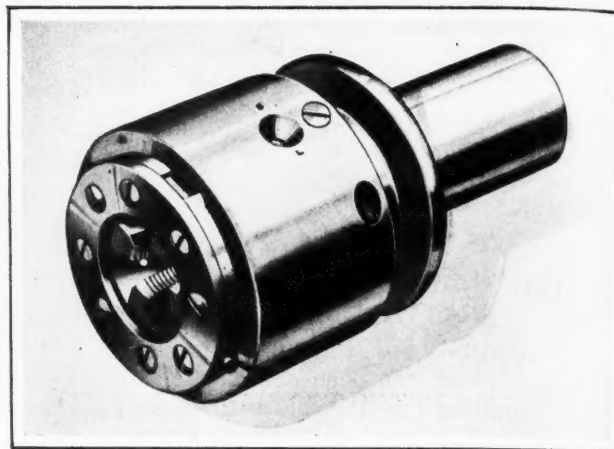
"Namco" Opening Die with Quick-removable Chasers
